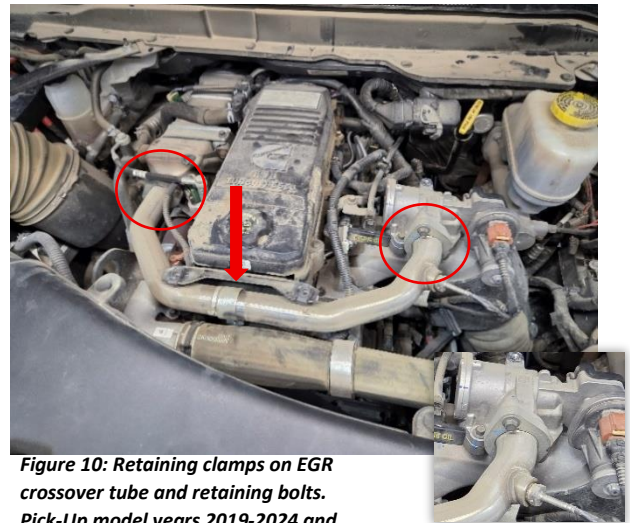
Retaining clamps on EGR crossover tube and retaining bolts. Pick-Up model years 2019-2024 and cab and chassis models.
